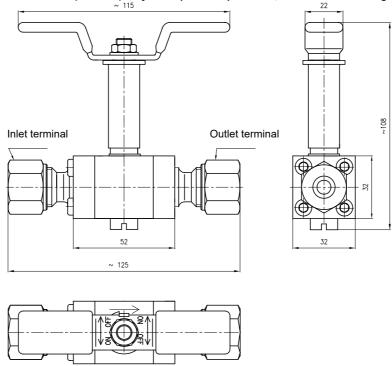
Ball valve - example of special modification - lockable design (971 .. U1), dimensional drawing
